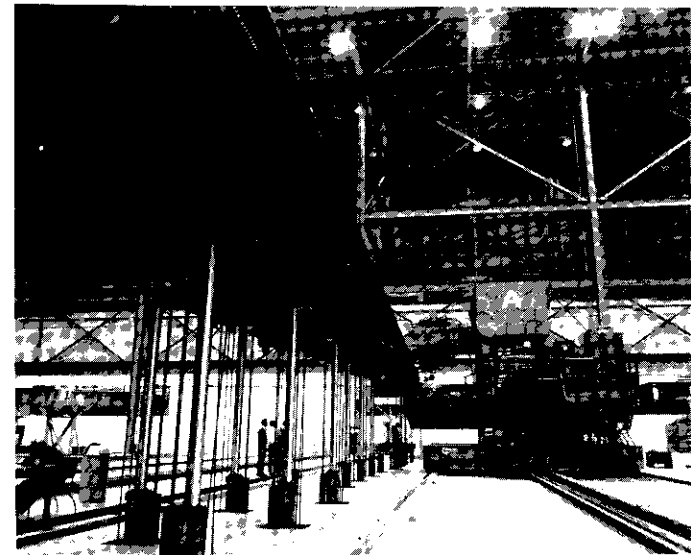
RIVETING STRINGERS TO 747 UPPER WING PANEL ON GEMCOR DRIVEMATIC RIVETING MACHINES
